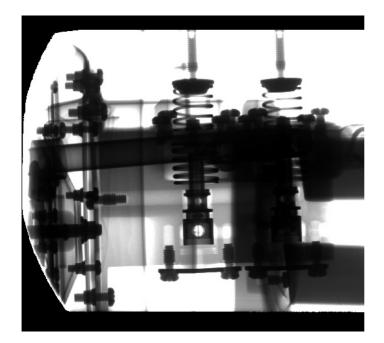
Upper Pressure Relief Valve, control assembly, x-ray.
